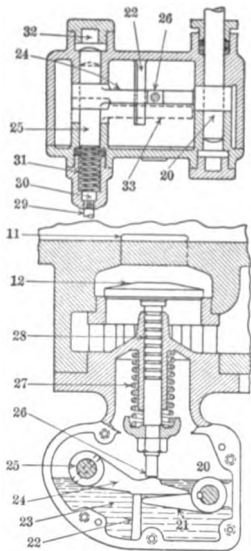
AUXILIARY EXHAUST VALVE AND GEAR, SKINNER UNIFLOW ENGINE
